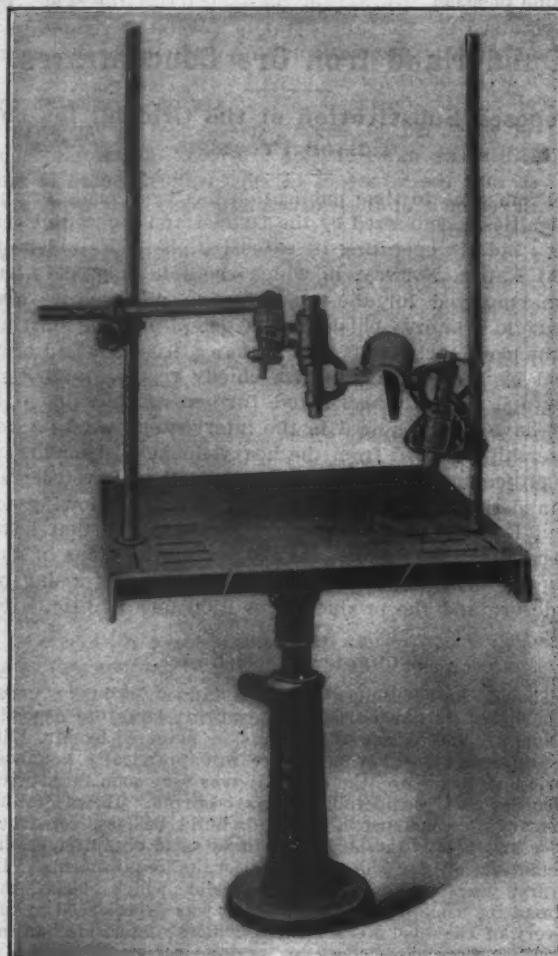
A Table and Supports for Holding Work While Welding, Made by the Autogenous Welding Equipment Company, Springfield, Mass.
